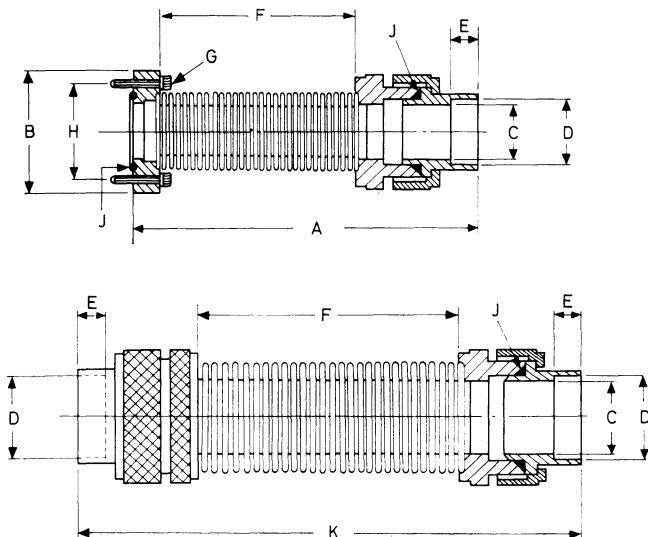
Dimensions of flexible vacuum couplings supplied by Edwards³²⁹ (see Table 5.2)
